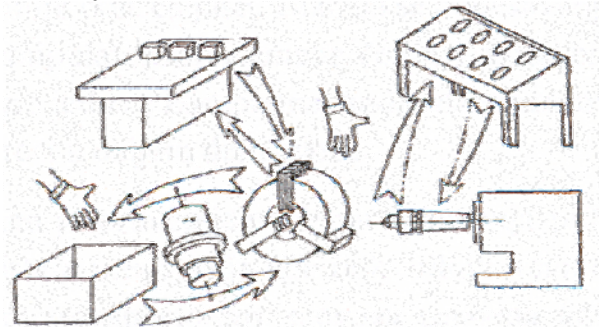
Principle scheme of fixture handling in frame of NC machine tool
